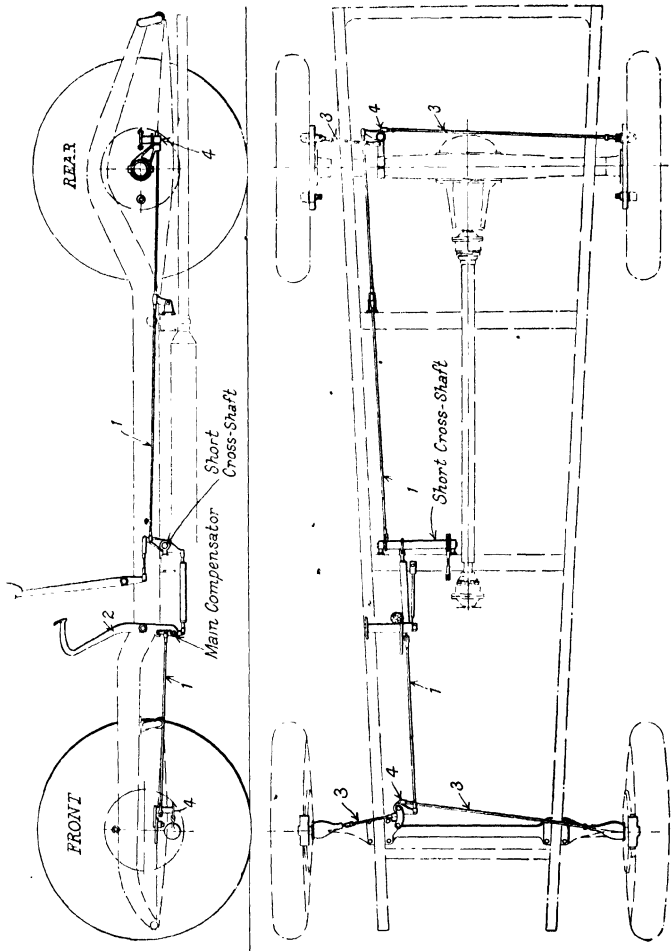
CHASSIS DRAWINGS OF A GIRLING MECHANICAL BRAKING SYSTEM SHOWING RODS (1, 3) AND AXLE-MOUNTED COMPENSATORS (4)
